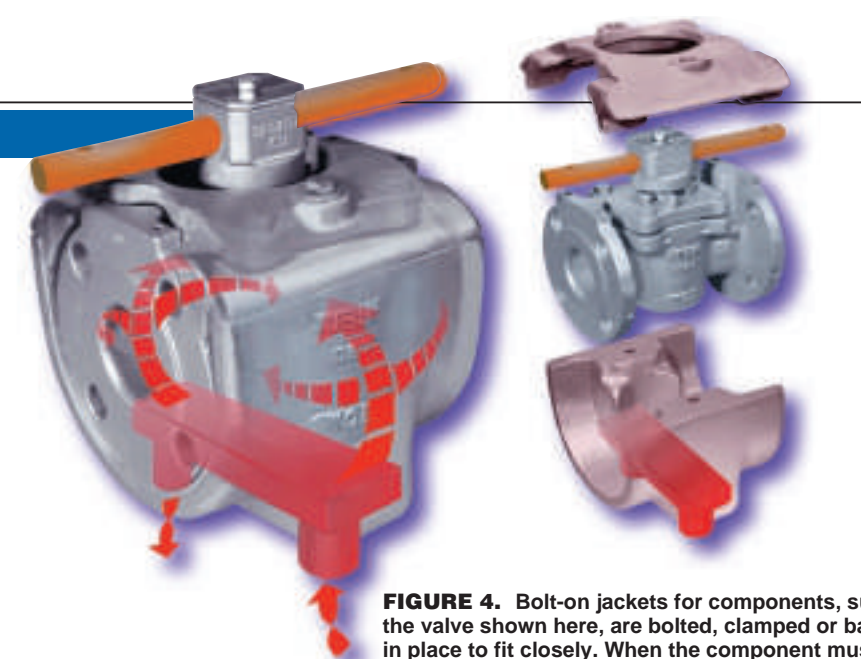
Bolt-on jackets for components, such as the valve shown here, are bolted, clamped or banded in place to fit closely. When the component must be replaced, the jacket can be removed, the new component installed, and the jacket bolted back on
